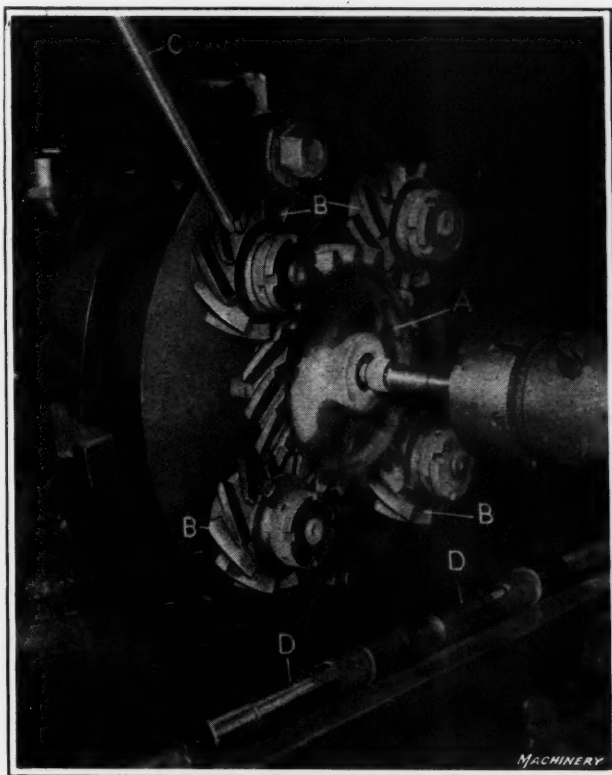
Internal Grinding Machine equipped for grinding Bore of Spiral Gears
